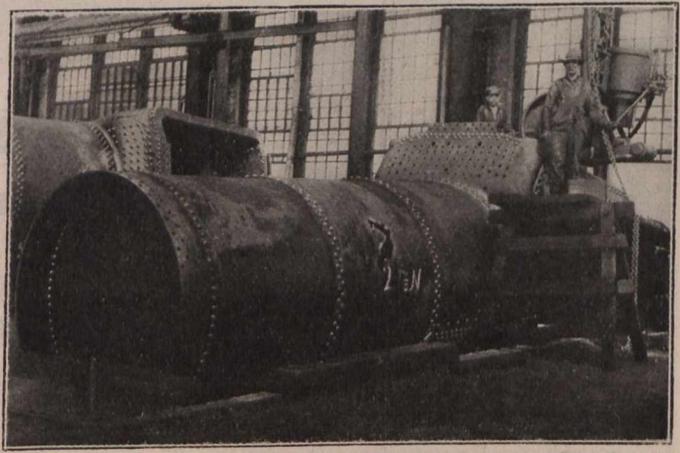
Pit Stand where Mud Ring is Rivetted and Firedoor Opening Fixed.
